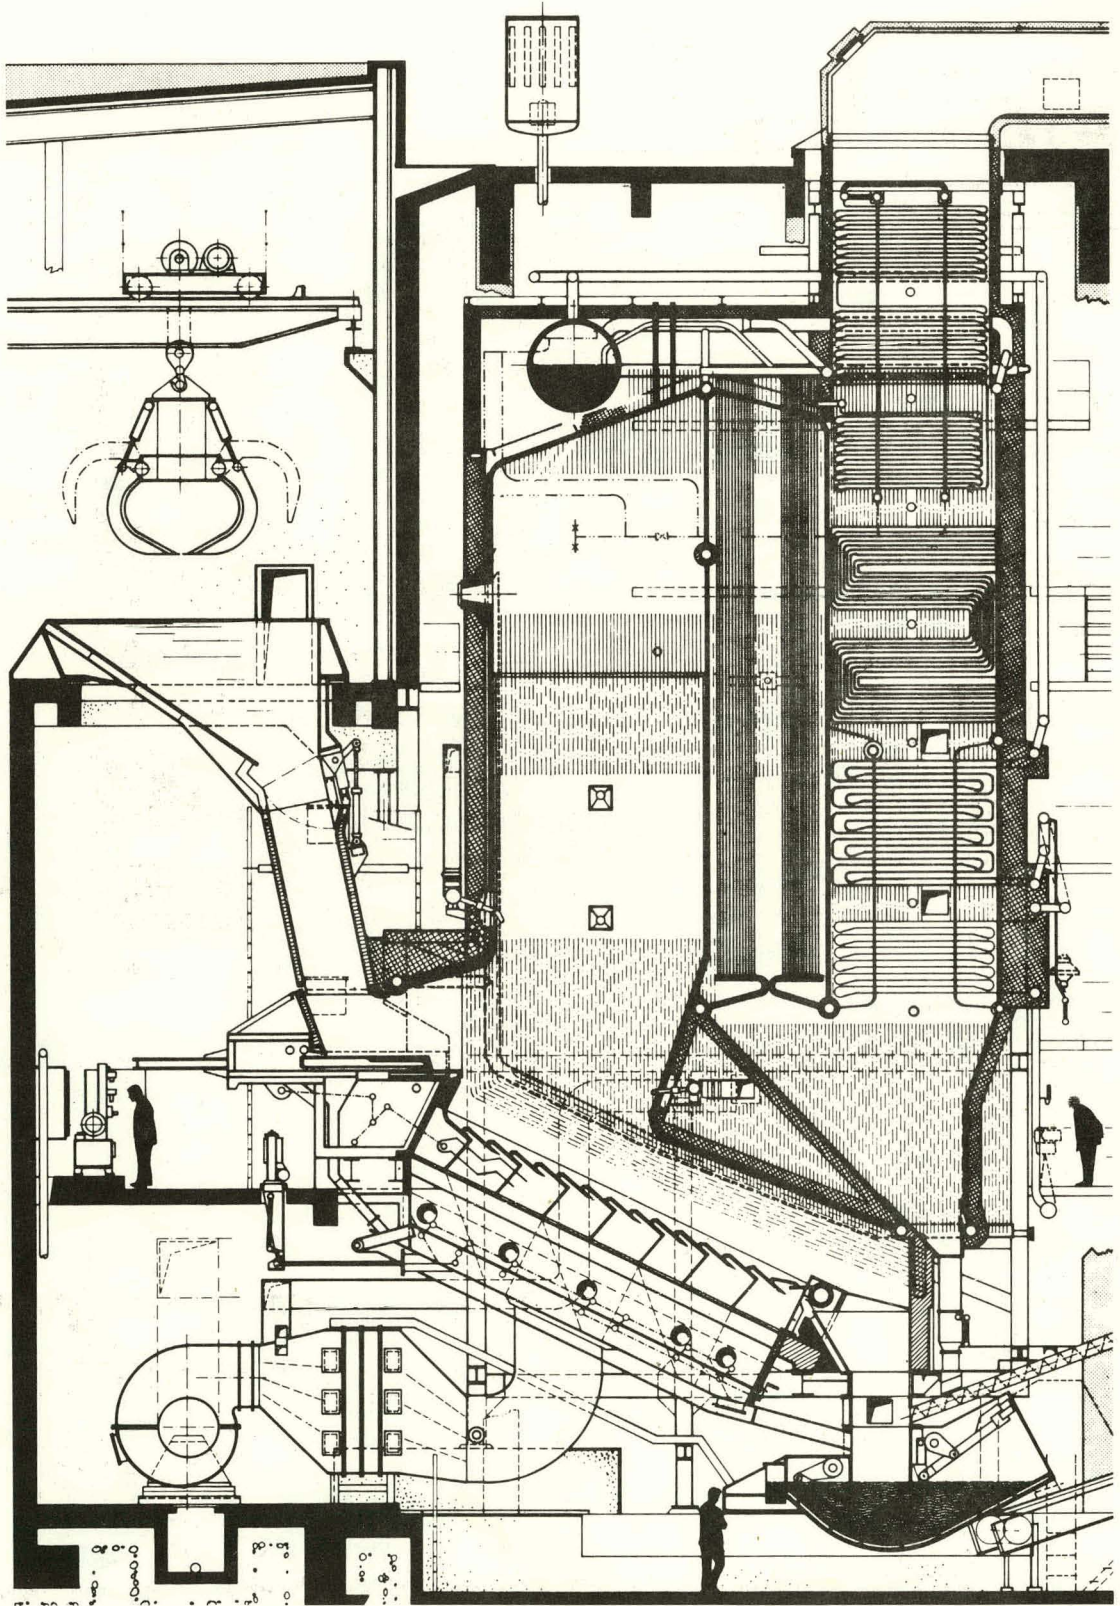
Boiler Design with Rapped Platen Heating Surfaces.
